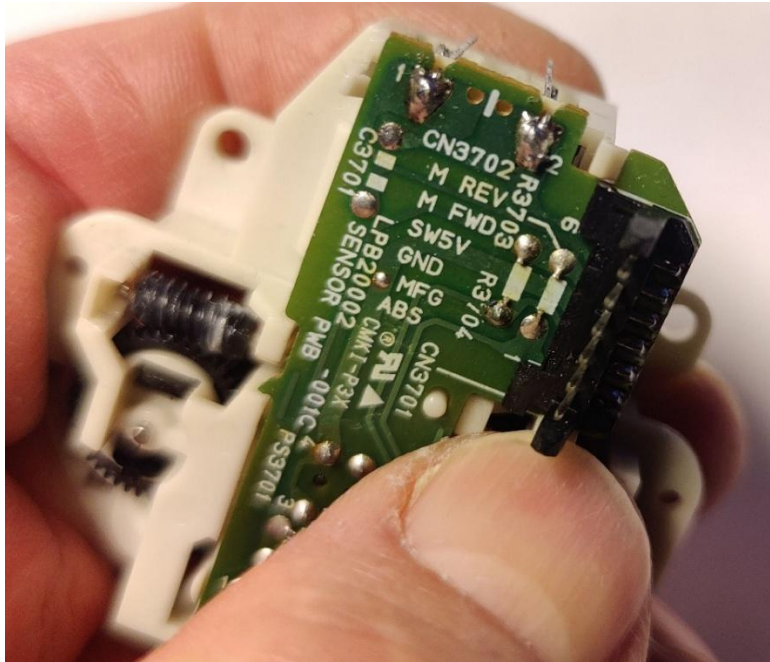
After desoldering the motor wires, snap off the PCB by carefully bending back the clip under thumb and then slide to right.
